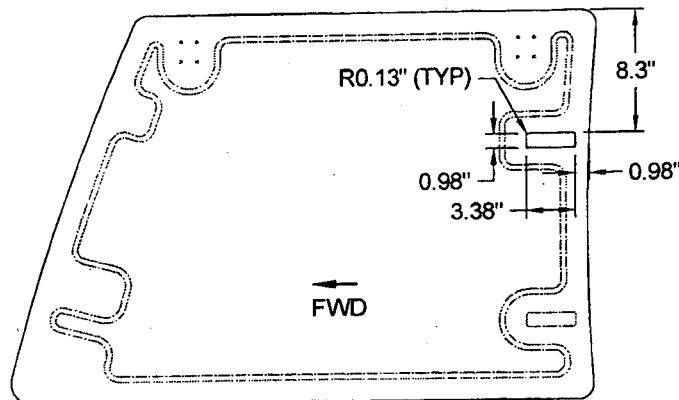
(b) – D3186-2 SPACEPOD™ DOOR LATCH CUTOUT
